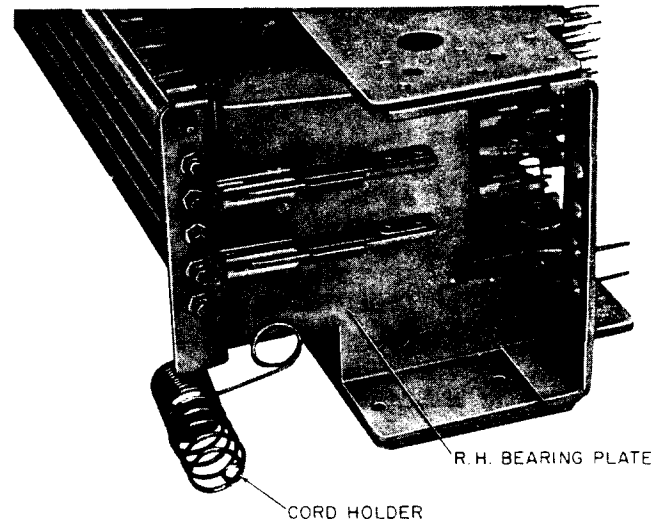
Mounting Cord Holder on CA-CF Series Crossbar Switches
